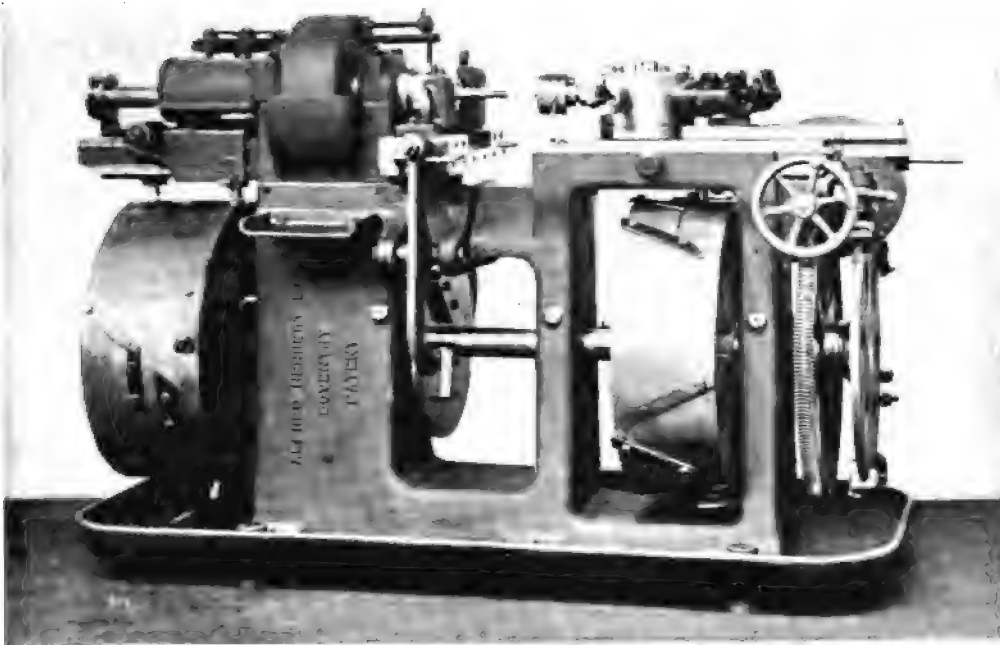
AUTOMATIC SCREW MACHINE (Standard Type). (A. Herbert, Ltd.)
